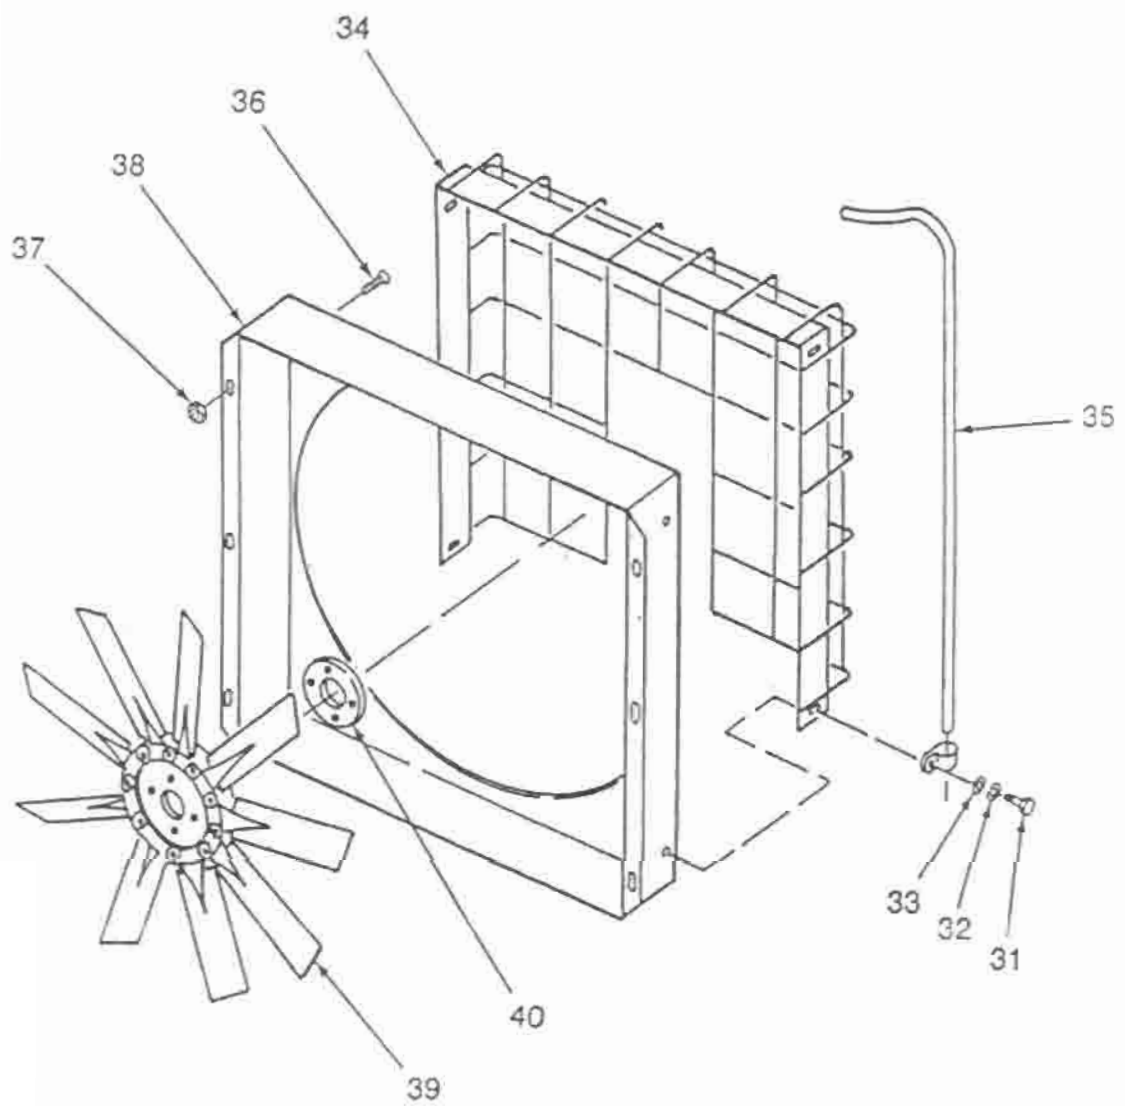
Radiator And Oil Cooler Mounting Group (Sheet 2)
